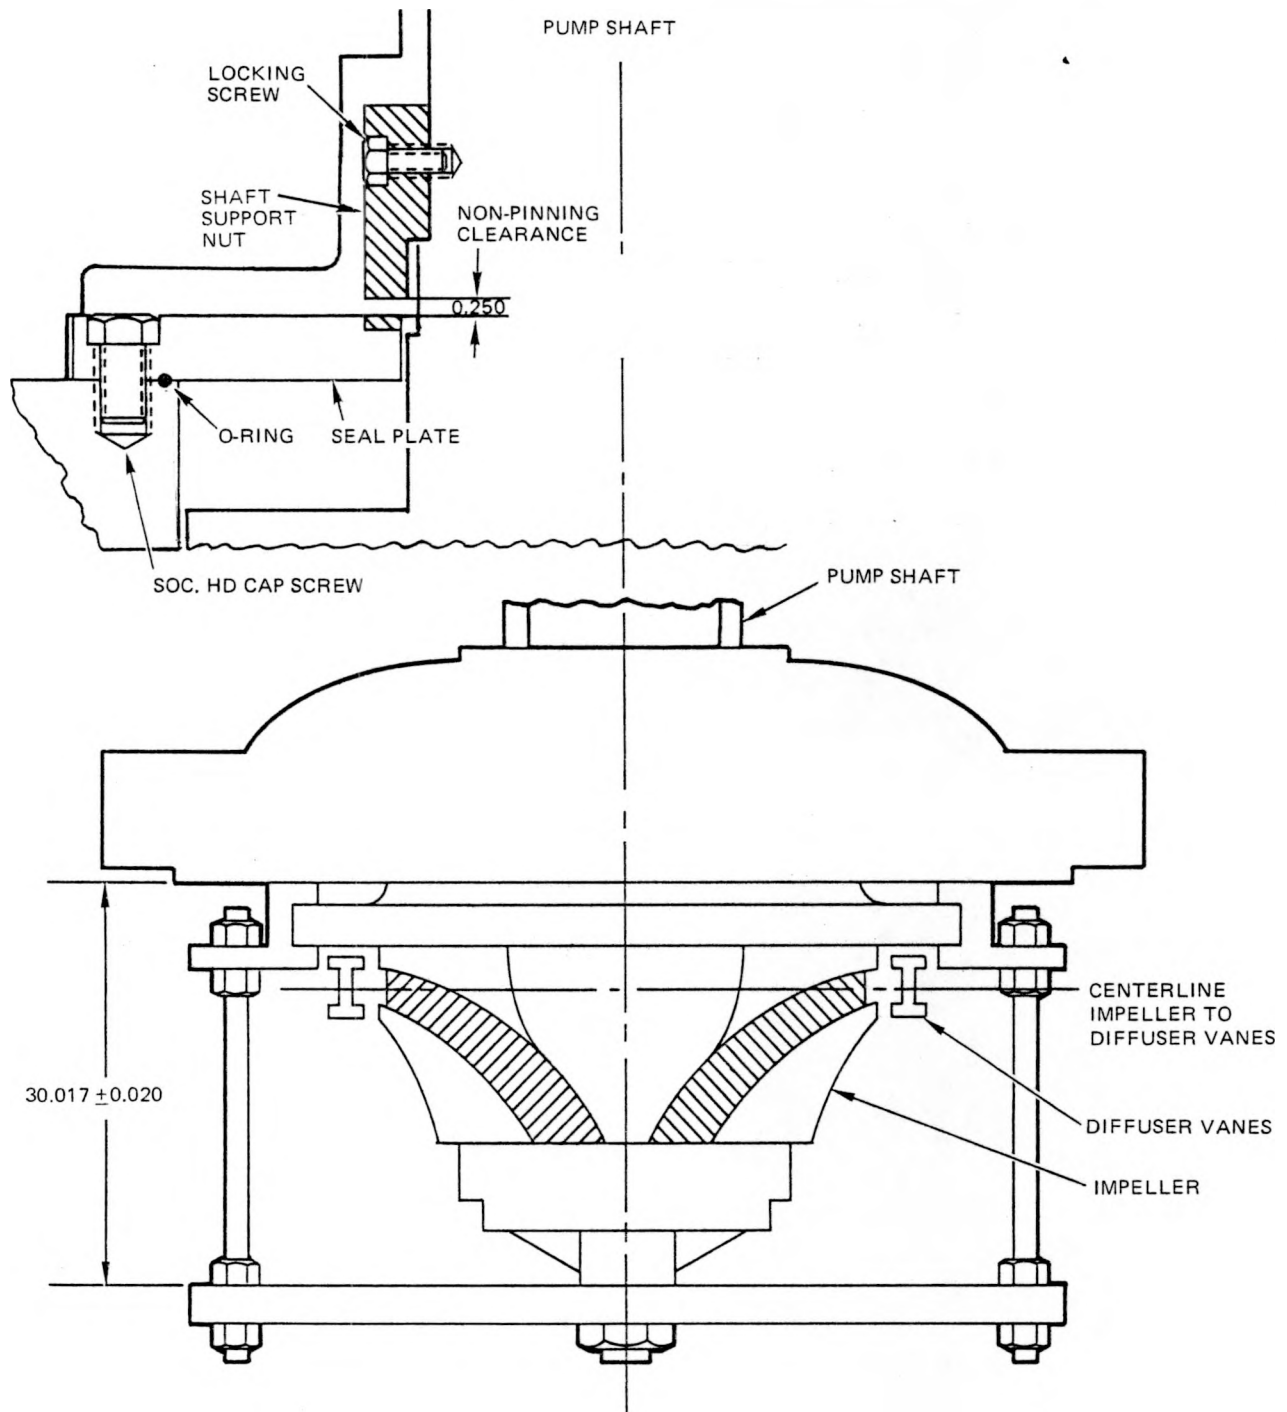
Seal Plate to Shaft Nut Clearance
